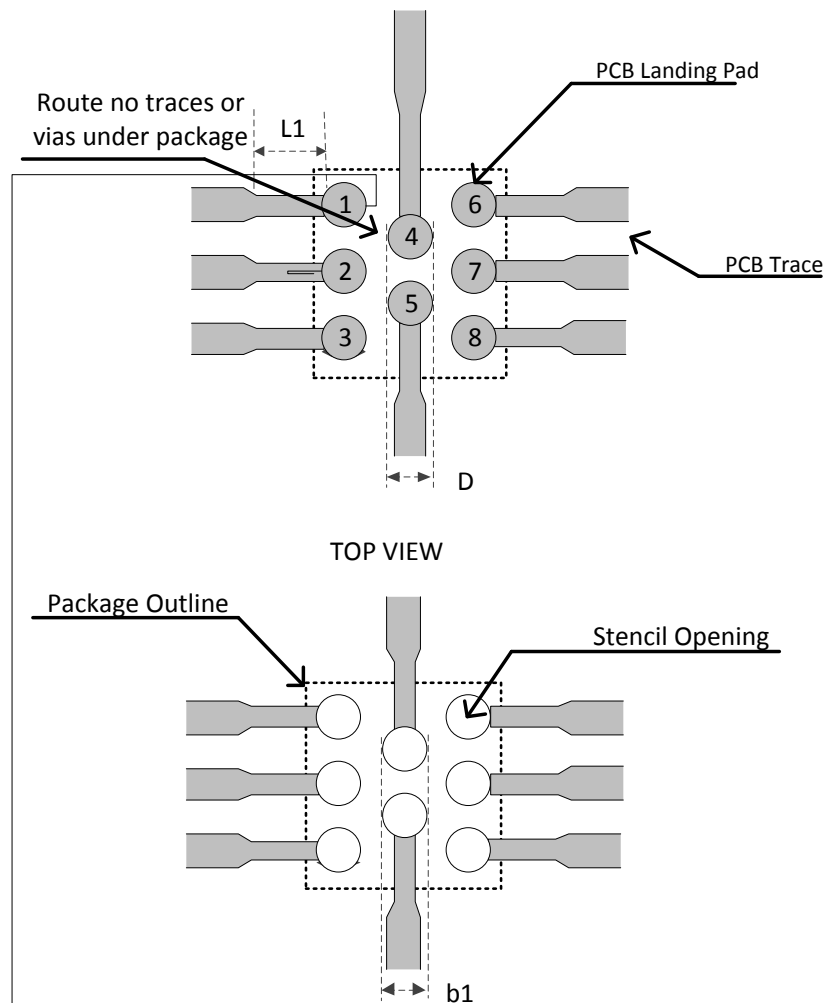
PCB and Stencil Design Recommendations (10-pin 1.6x1.6mm Package)
